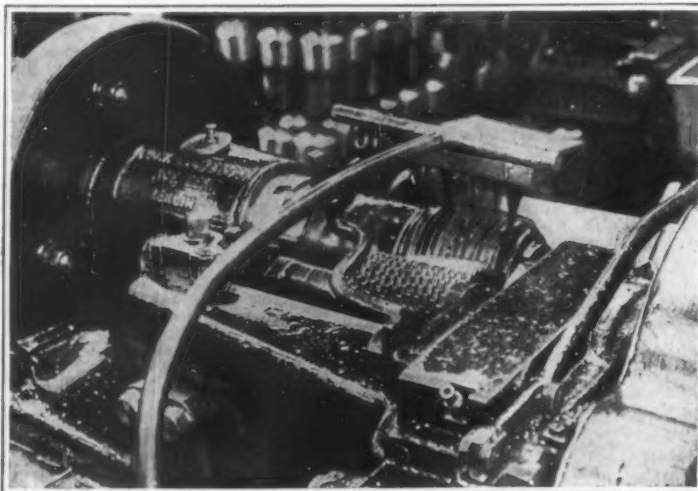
Flanging a cylinder in seven and one-half minutes; the previous tool took nearly three hours.
